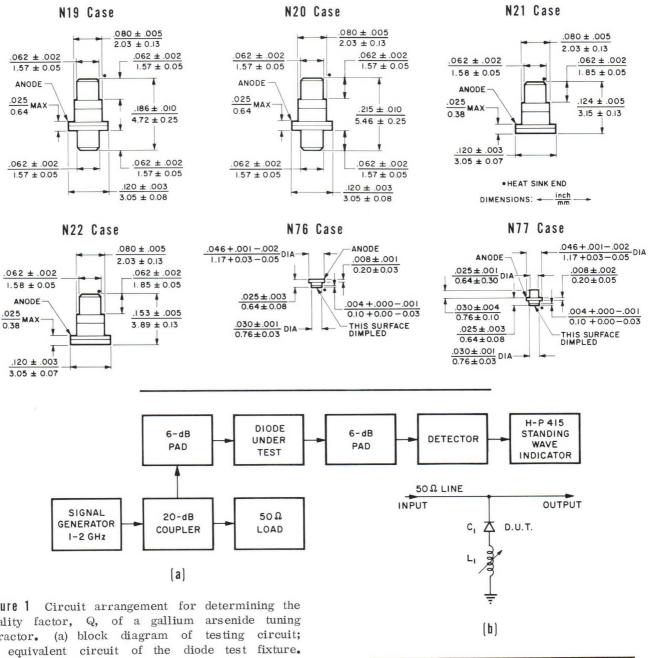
Circuit arrangement for determining the quality factor, Q, of a gallium arsenide tuning varactor. (a) block diagram of testing circuit; (b) equivalent circuit of the diode test fixture.
